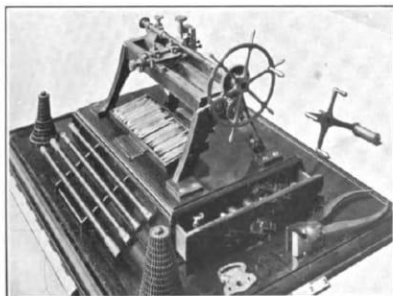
MAUDSLAY'S SCREW-CUTTING LATHE
